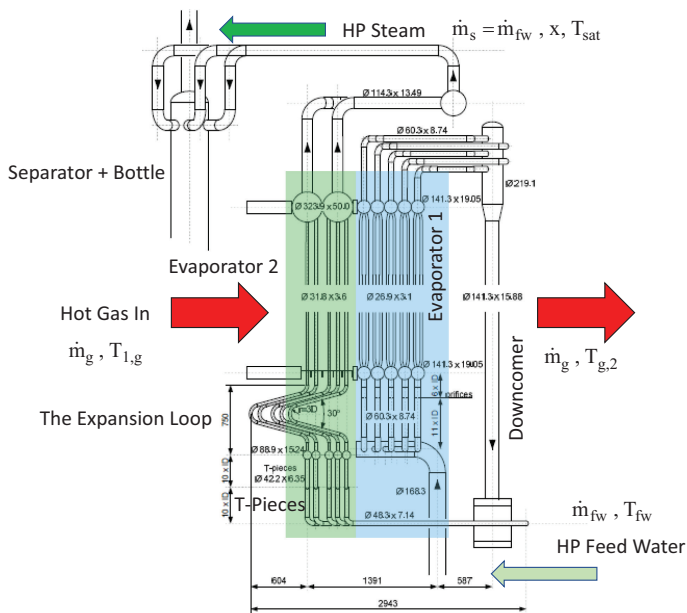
Heat and mass balance of the Benson boiler section.
